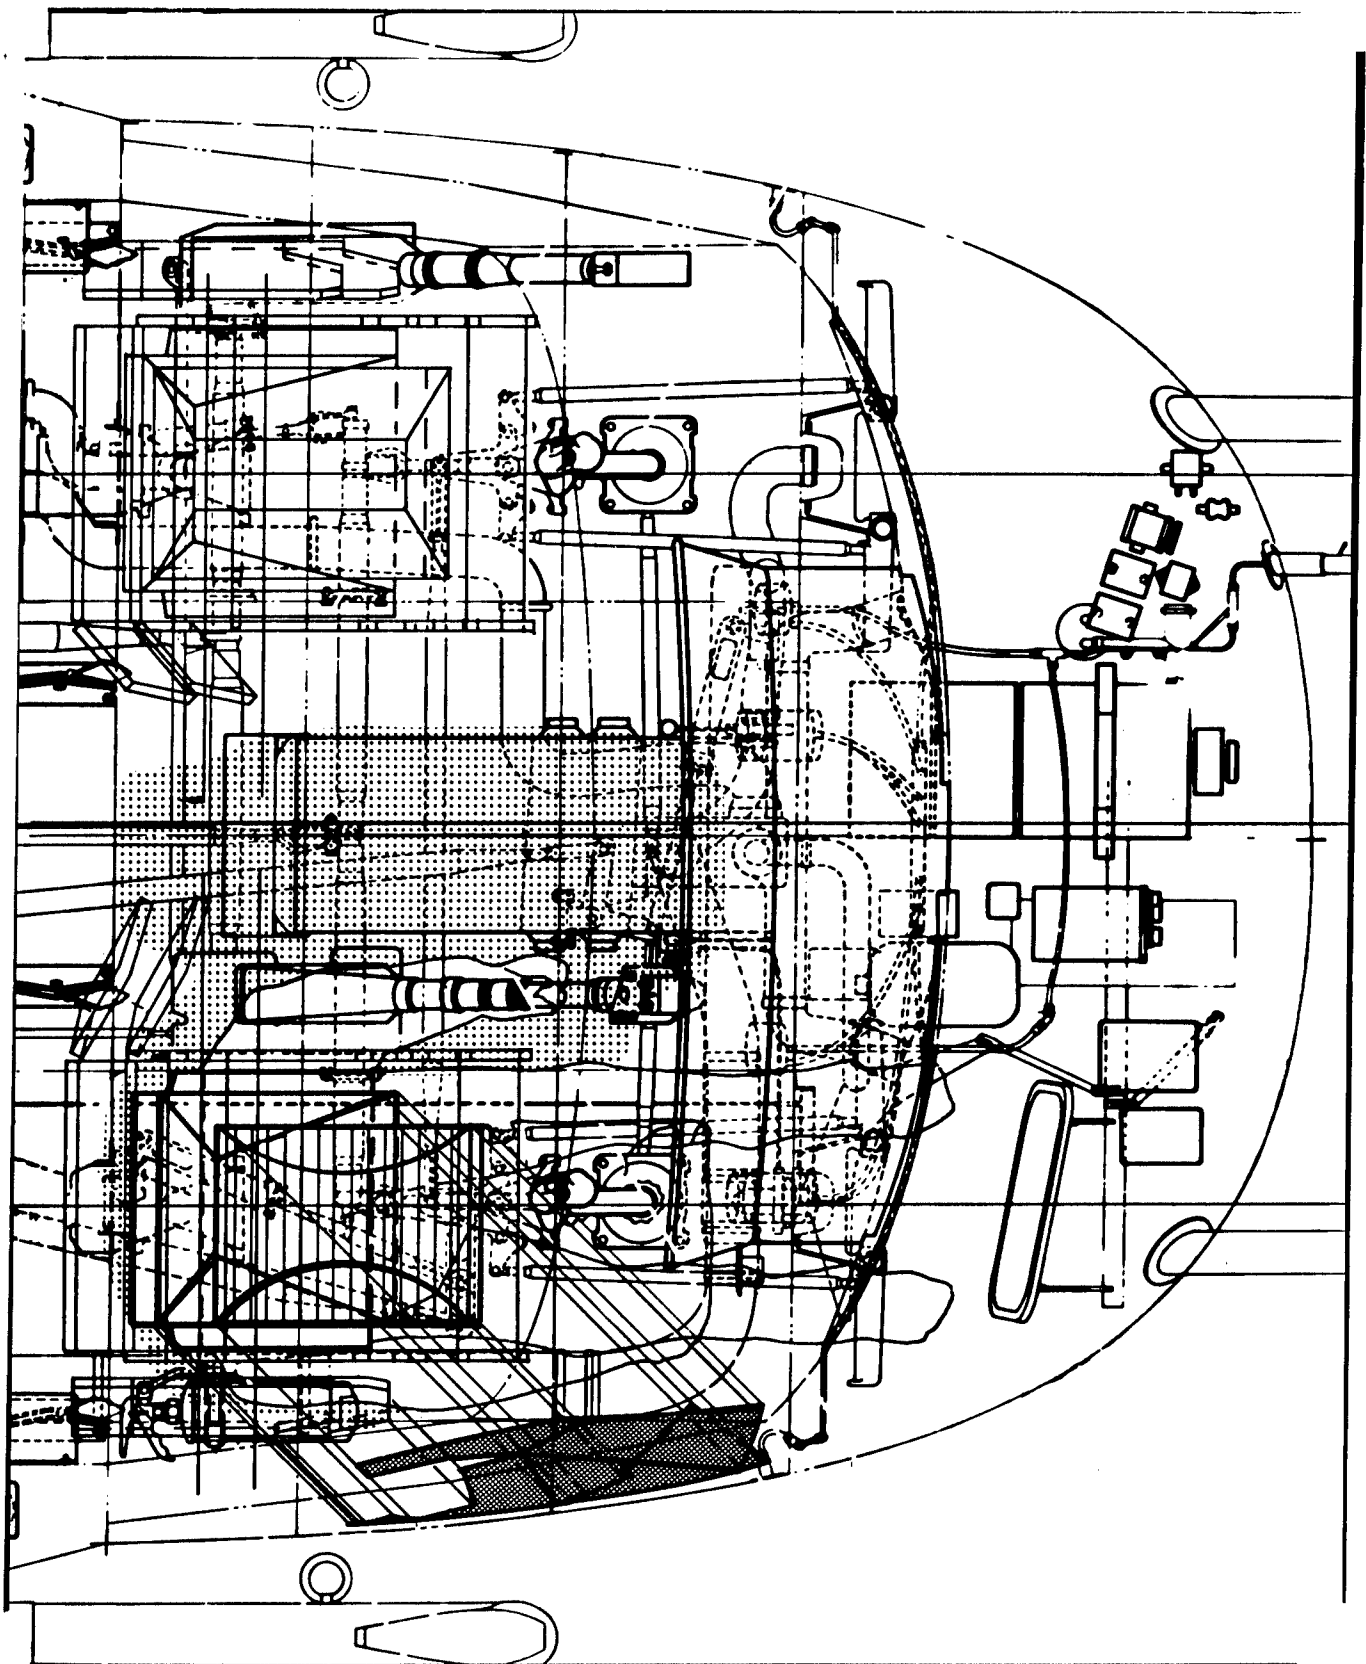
ARMOR CONFIGURATION 1 -- PLAN VIEW 45° AZIMUTH, -45° ELEVATION
